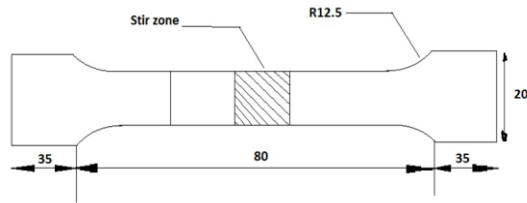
ASTM Dimensions (mm) for tensile test Specimen
